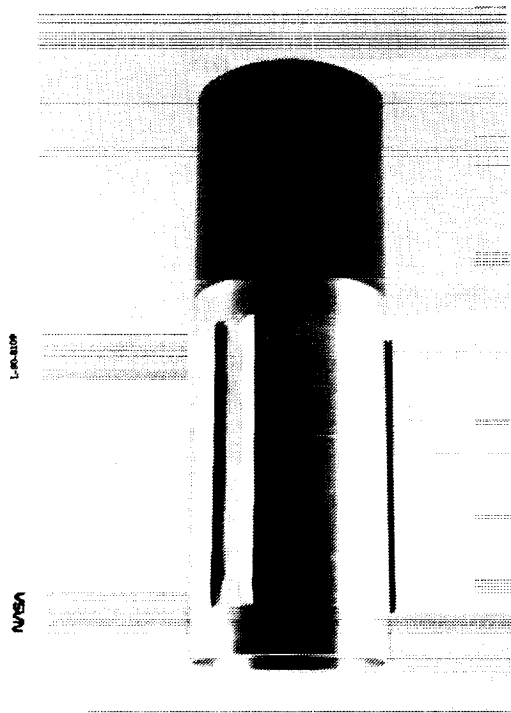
Cooling fins explosively bonded to Candu pressure tube.
